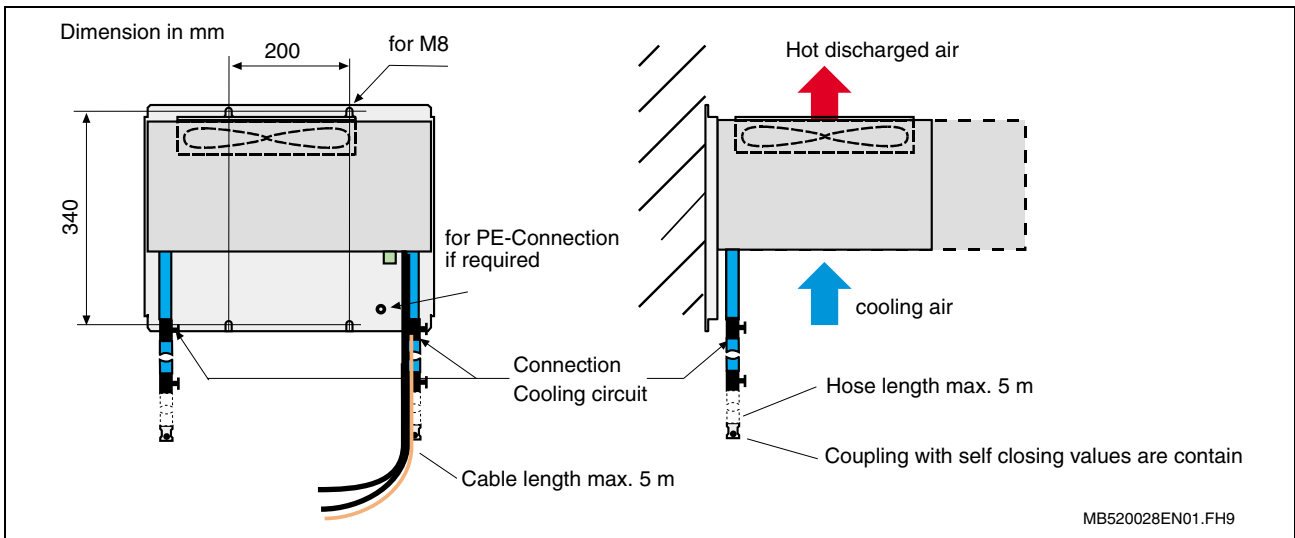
Dimension sheet for wall mounting, size class G
